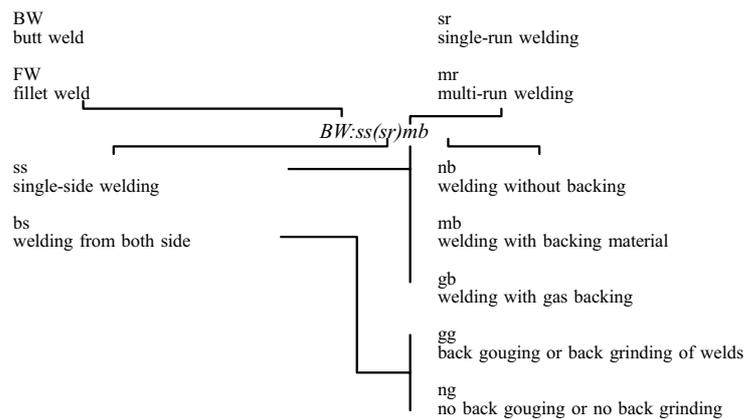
Coding diagram for weld type and welding details
